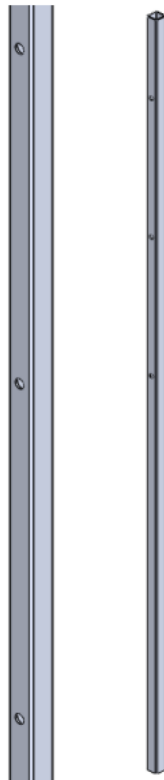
Images of the static shaft. The shaft is pictured on the right, while the image on the left is a close up image of the counterbored holes for the rack mounting screws.
